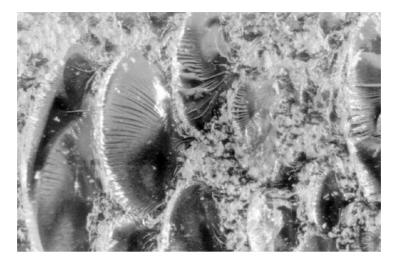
Machined surface morphology of LCLE at the cutting speed of 1 mm/min.
